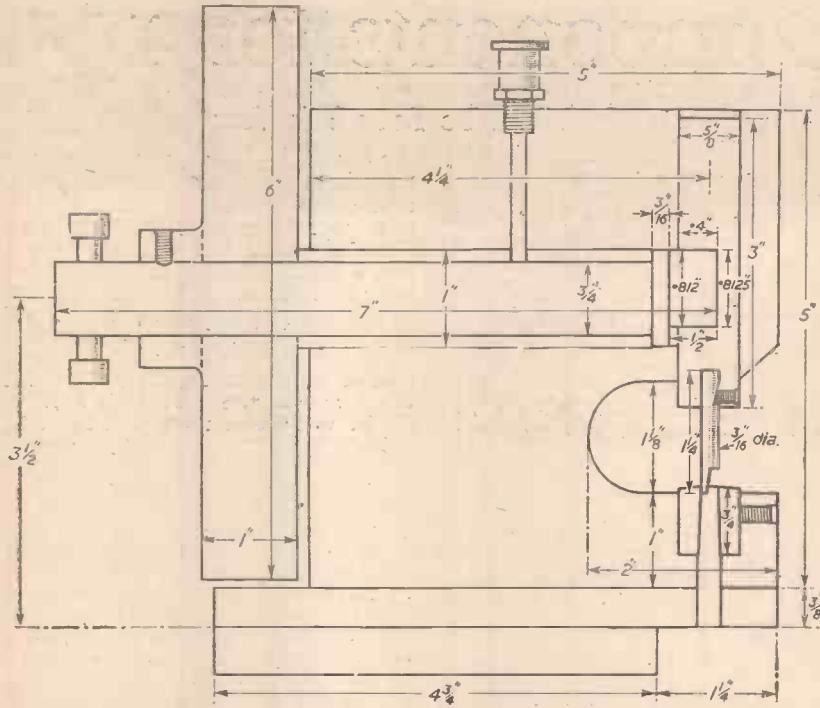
Sectional diagrammatic view of the nibbling machine.
